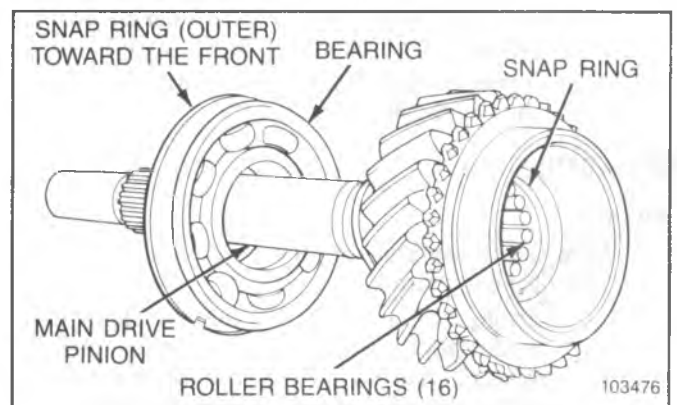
B3-22--Drive Pinion and Bearing Assembly
